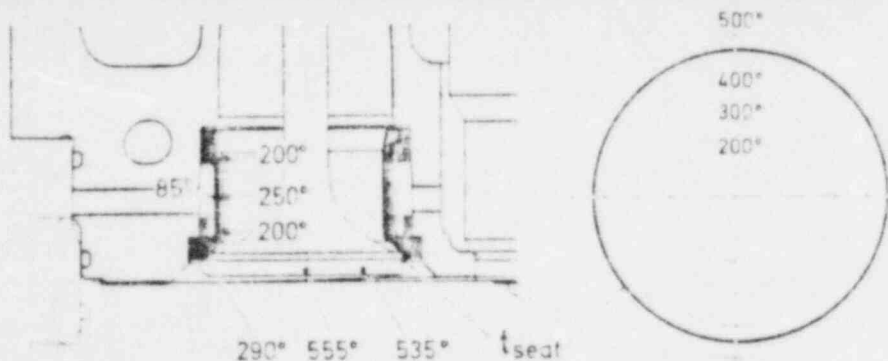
240/48 engine exhaust valve seat temperatures °C, engine running at 530 rev./min, b.m.p. 2.00.
